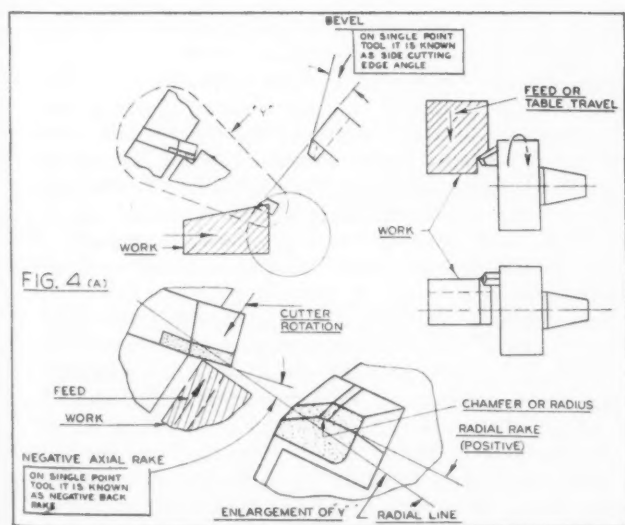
SETUP OF CEMENTED-CARBIDE-TIPPED MILLING CUTTER IN SIMPLIFIED FORM
